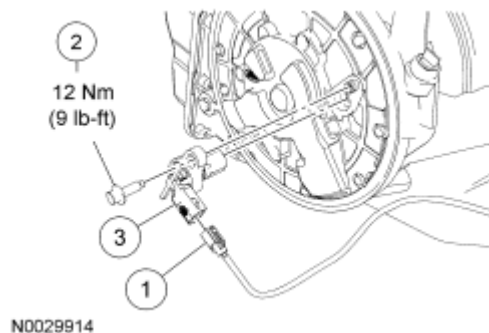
Exploded View Of Turbine Shaft Speed (TSS) Sensor With Torque Specification
